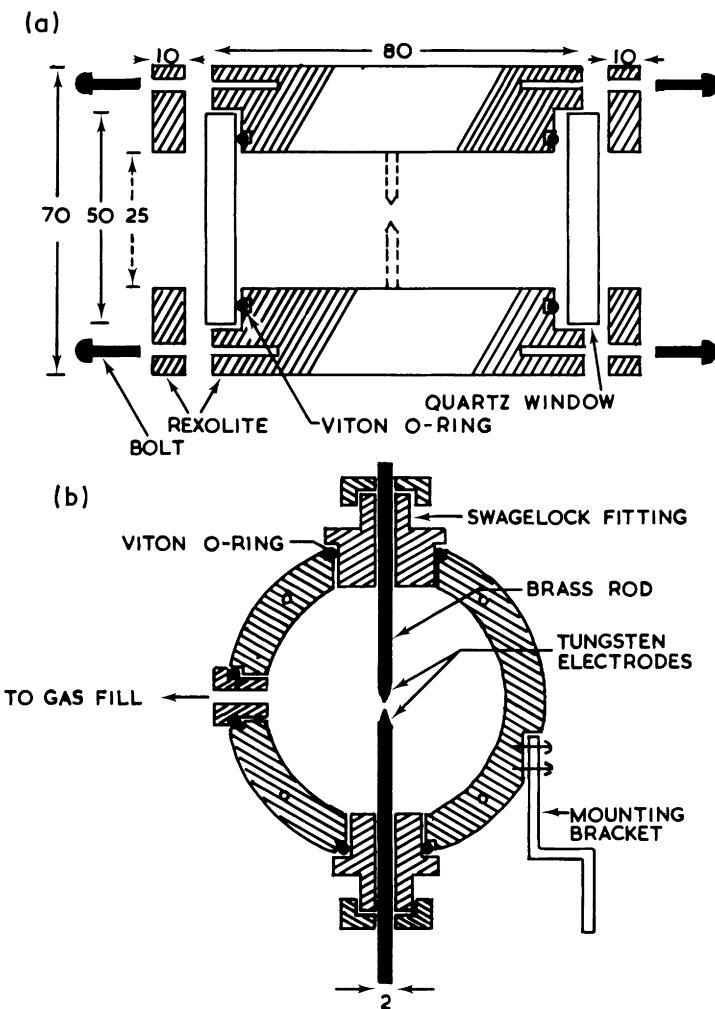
Design of low pressure flash lamp that can be machined from plastic (not drawn to scale). (a) Side view cross-section; (b) rear view cross-section. All dimensions in mm.
